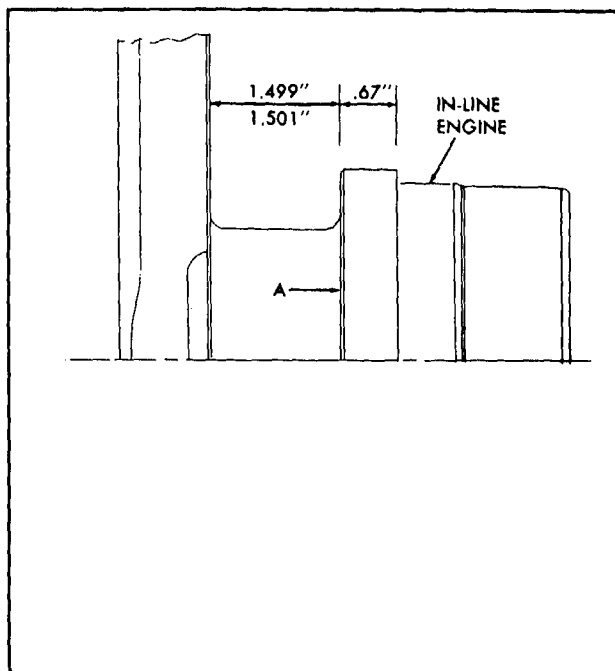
Standard Dimensions at Crankshaft Thrust Surfaces--In-Line Engines
